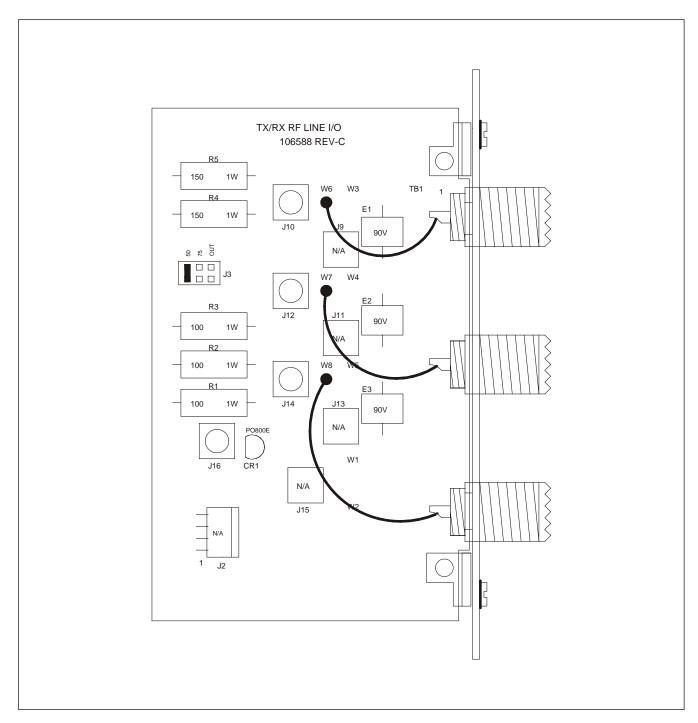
Component locator drawing, TX/RX RF Line I/O module (106590)
